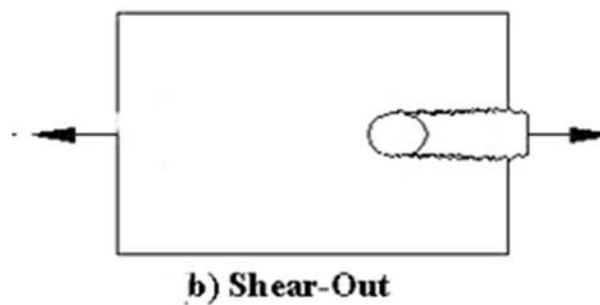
“Shear-out” Failure of a Bolted Joint Under Excessive Bearing Load
